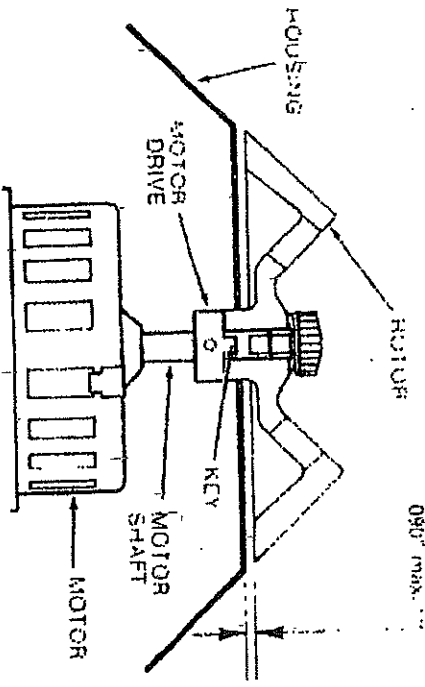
Cutaway View showing Correctly Installed Rotor.
